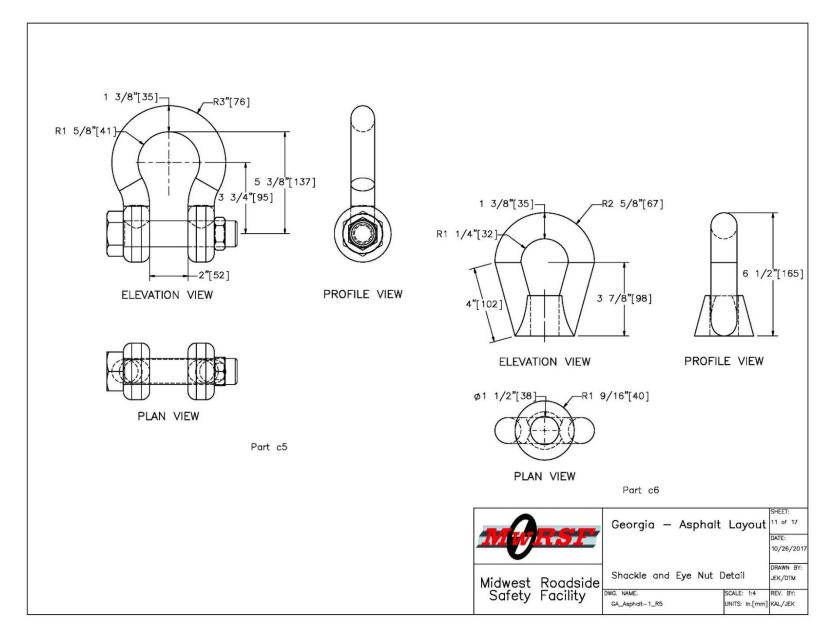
Shackle and Eye Nut Detail, Test No. GAA-1
